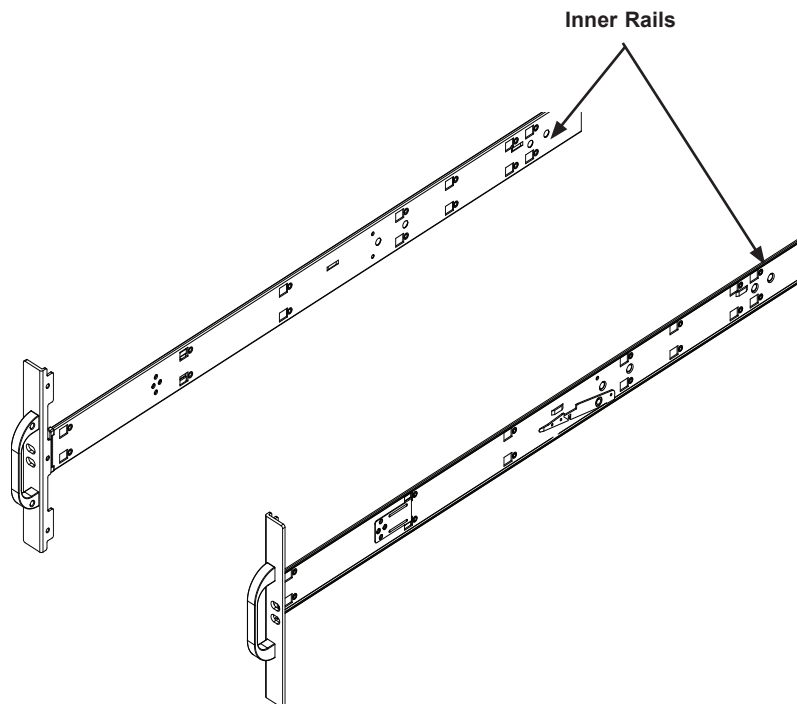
Identifying the Inner Rails and Chassis Handles
